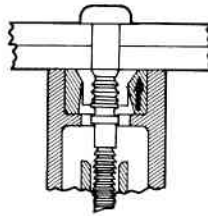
Installation of Huck Lockbolts (Sheet 1 of 3)
